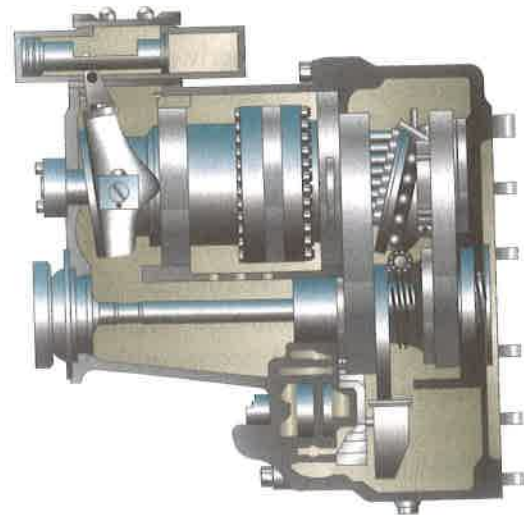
A hydraulic constant speed drive for an AC alternator.
